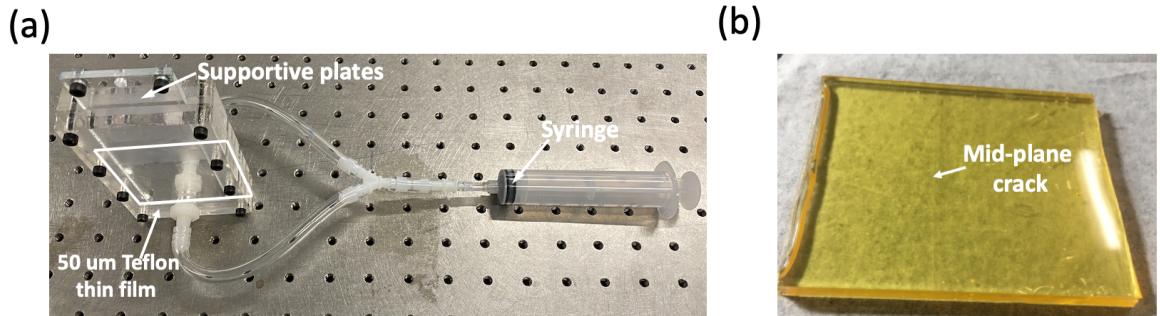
(a) Injection molding setup to mold polyurea with a sharp mid-plane crack. (b) Polyurea specimen with a mid-plane crack.
